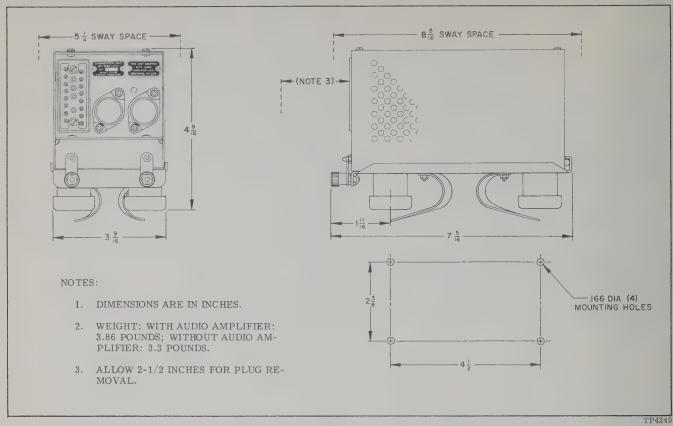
DV-318A Dynaverter with M-28 Mounting, Installation Dimensions
